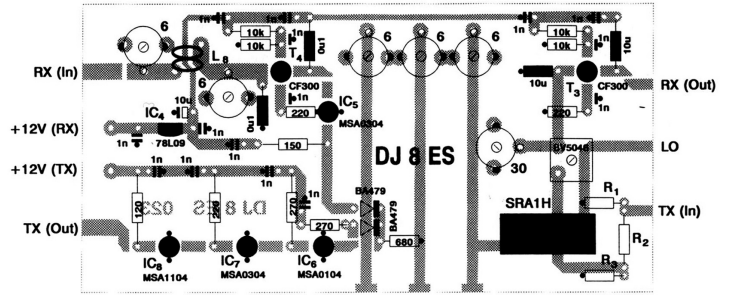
Component layout for the 70cm transverter showing the component side of the PCB
